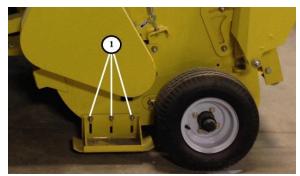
Skid Shoe Adjustment Key 1 – Carriage Bolts for Adjusting Skid Shoe Height
